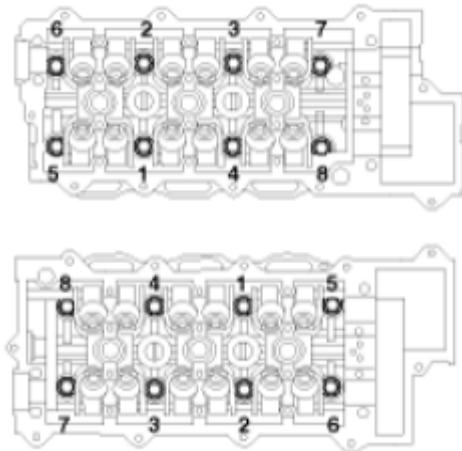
Identifying Cylinder Head Bolts In Sequence
